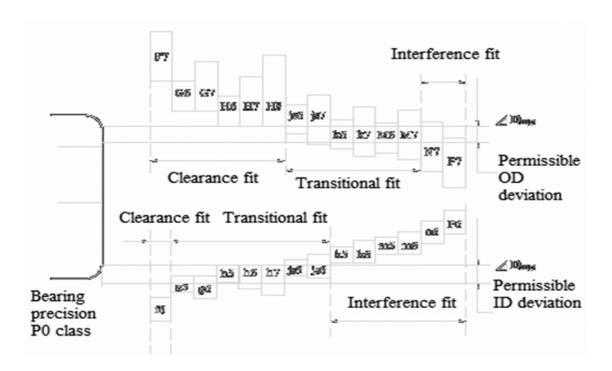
Relations between dimension tolerances of shaft and housing bore and fit (bearings of PO class precision).
